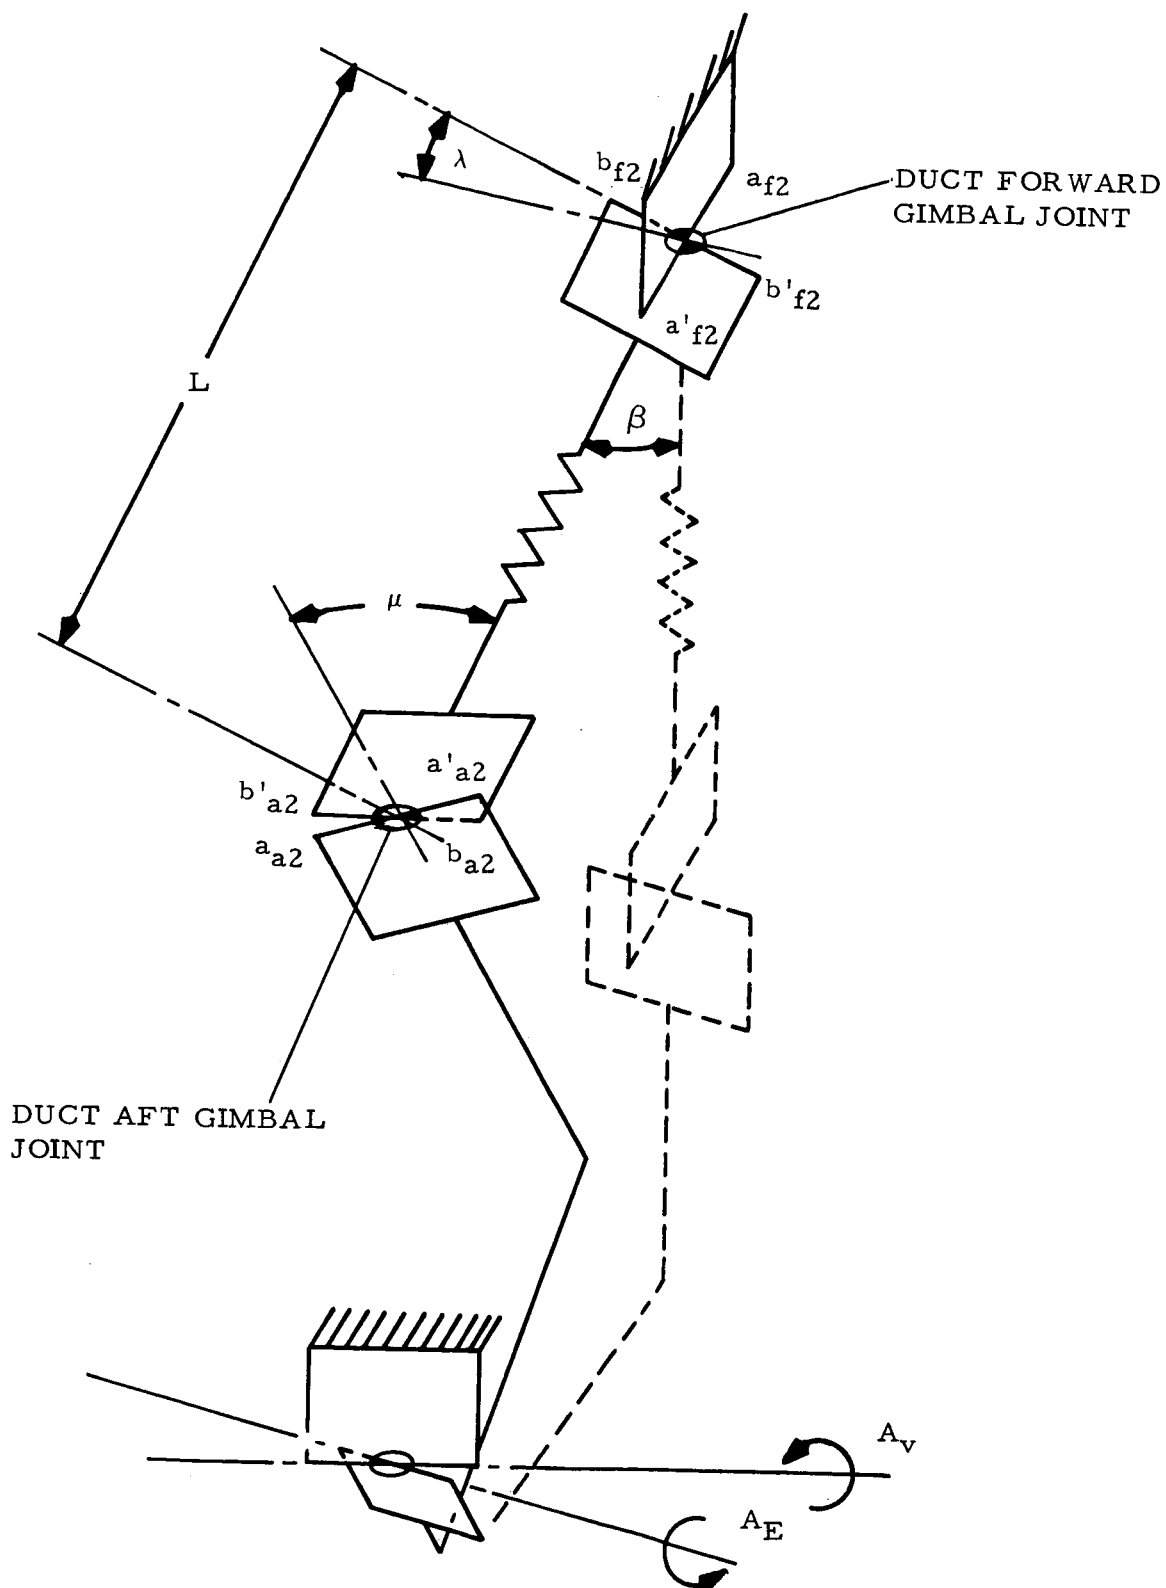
F-1 ENGINE AND PUMP INLET DUCT GIMBAL JOINTS SYSTEM SCHEMATIC (GIMBALED POSITION)
